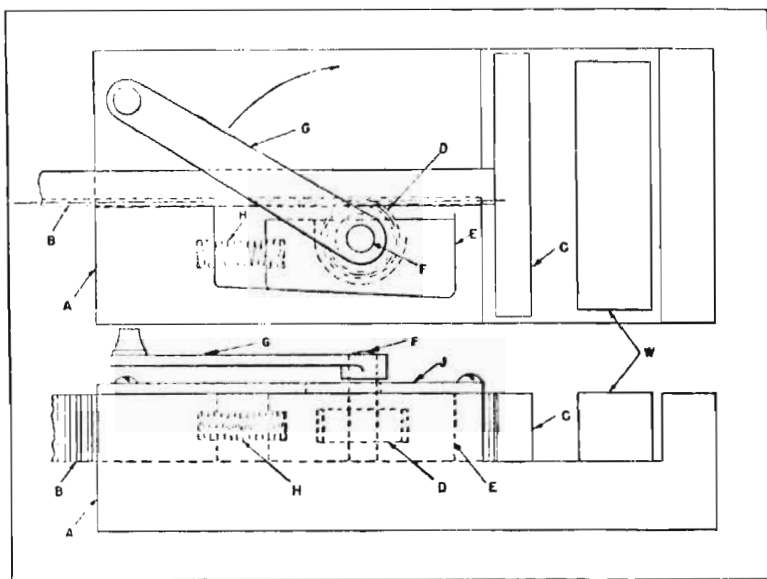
Vise Equipped with a Rack and Pinion that is Designed to Permit Rapid Clamping and Positive Locking in Any Position.
